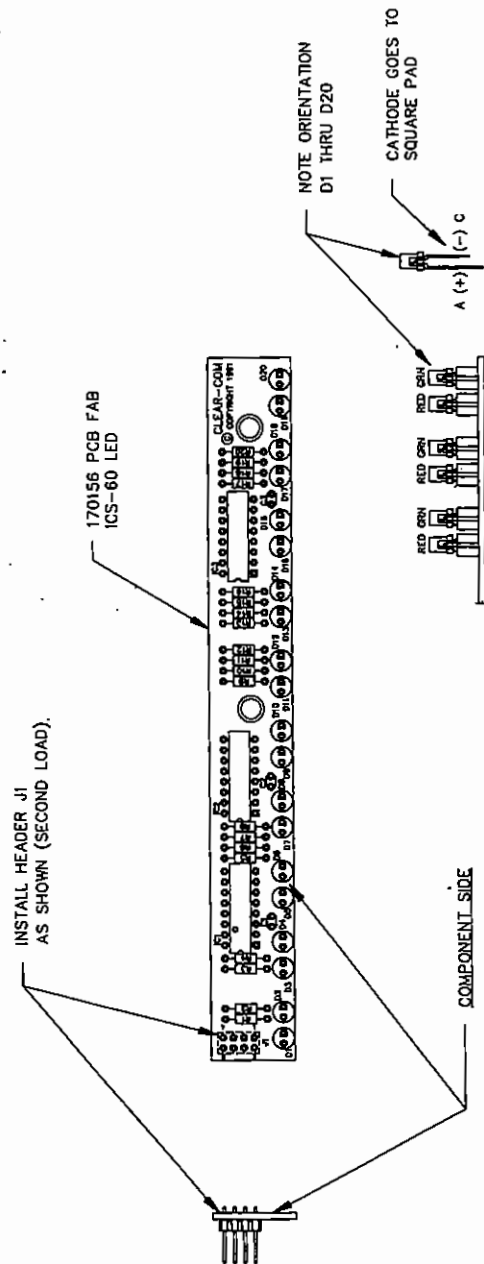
Assembly Drawing - ICS-102 Selector Switch LED PCB Rev. A
